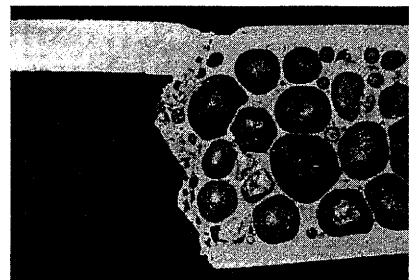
Laser beam welding of foamable pre-material with different process parameters
